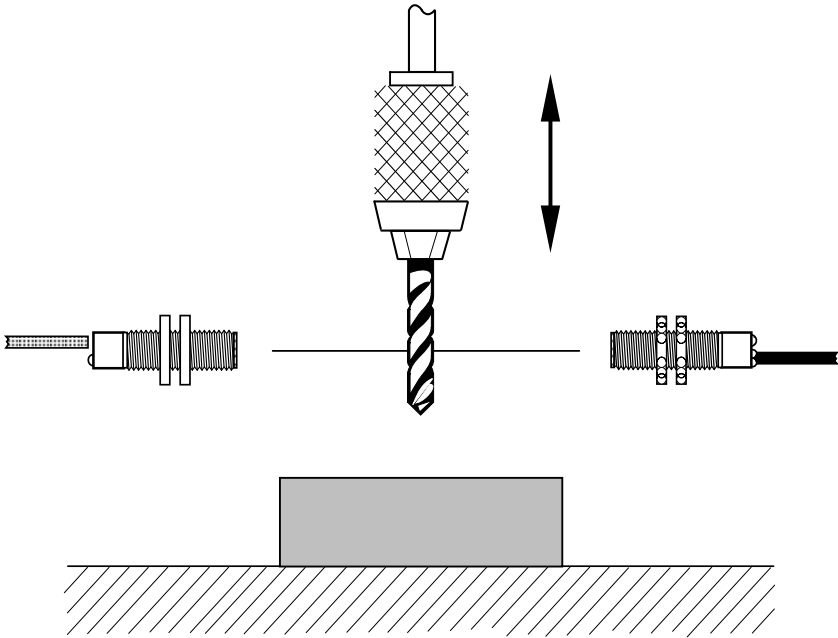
Checking for Broken Drills with a Through-beam Sensor
